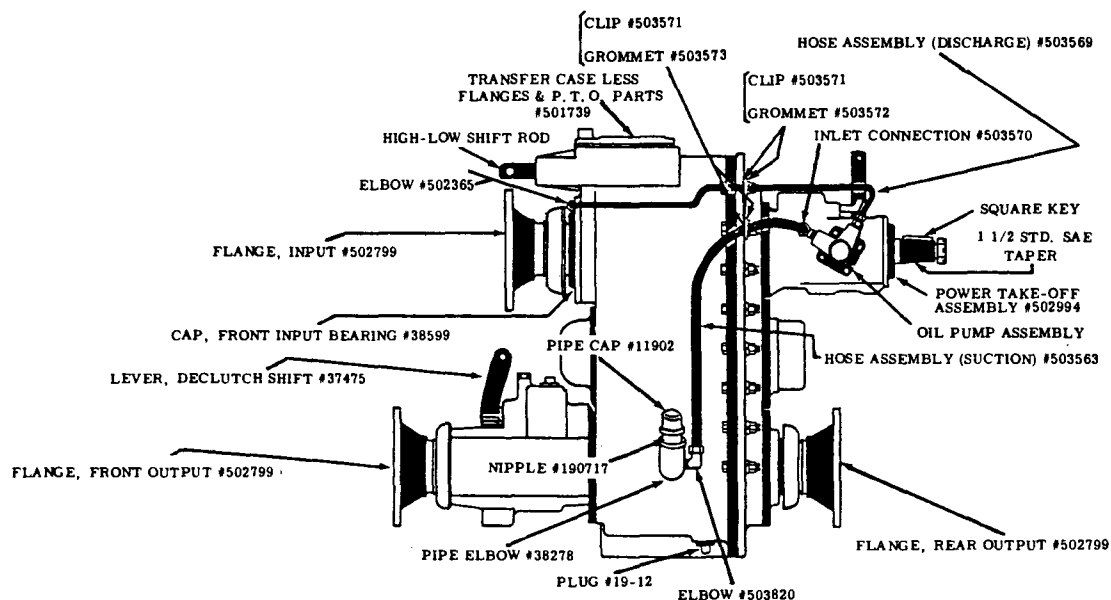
T-77 Transfer Case Power Take-Off Assembly
